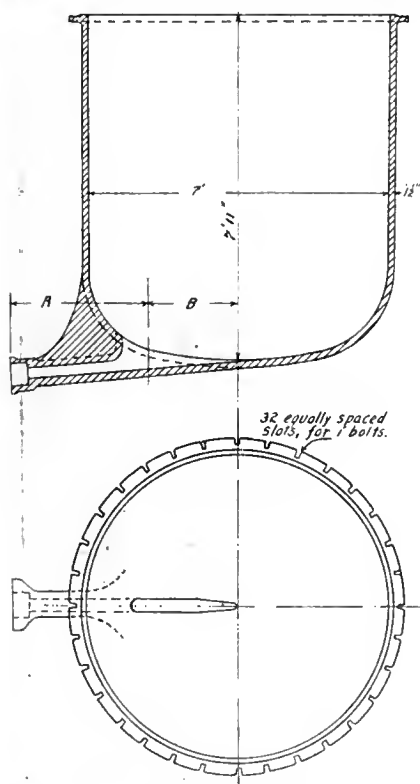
PLAN AND SECTIONAL ELEVATION OF CAST IRON STILL.
